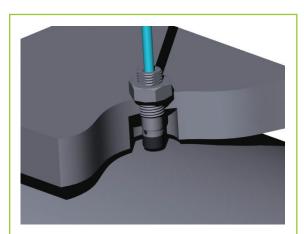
Cutaway rendering showing a probe with proper counterbore. This ensures that the probe's field will "see" only the rotating shaft, not the sides or back of the hole.
